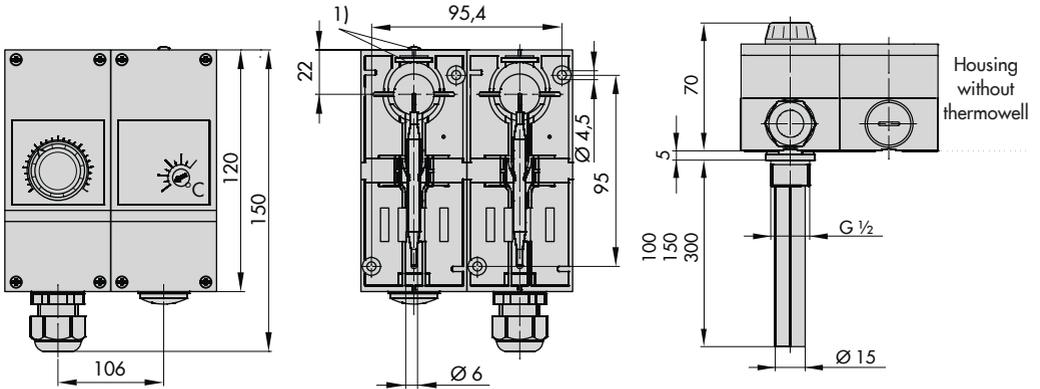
Dimensions in mm · Types 5347, 5348 and 5349 Double Thermostats
